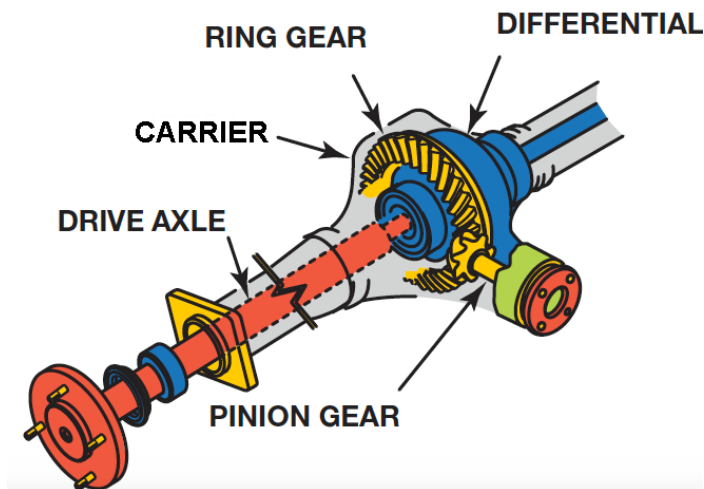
The cast iron center housing of the drive axle is called the differential carrier.
